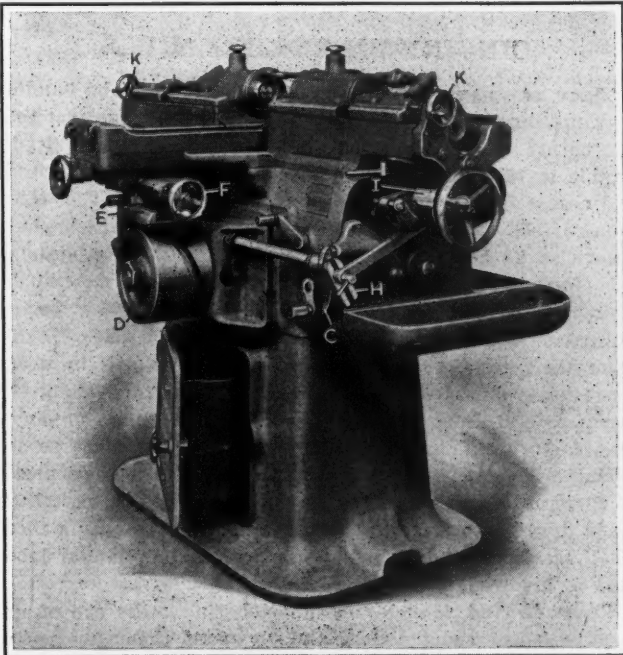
Feed Control and Table Feed Mechanism of the Taylor & Fenn Duplex Spline Milling Machine
